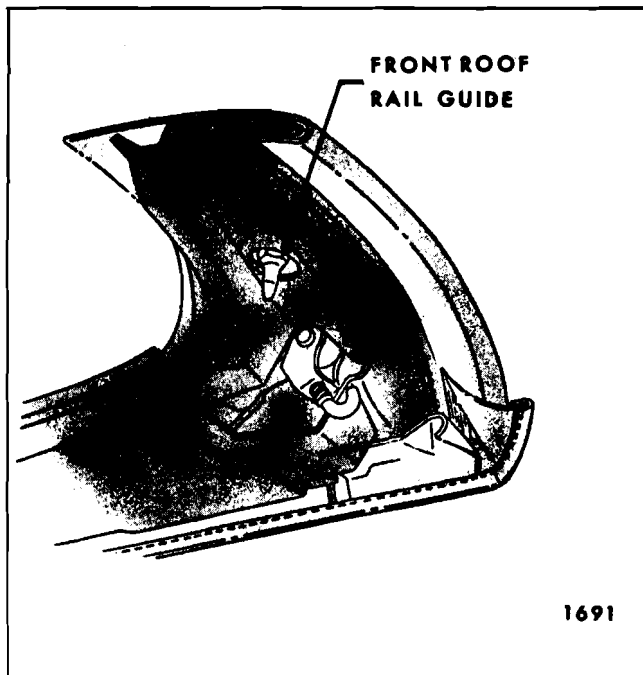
Front Roof Rail Guide and Lock Hook
